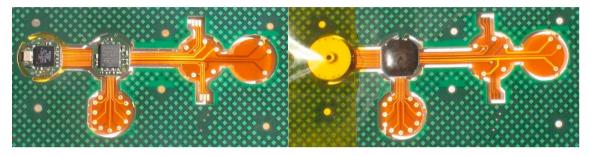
The miniaturized prototype, bottom layer (a), top layer (b)
